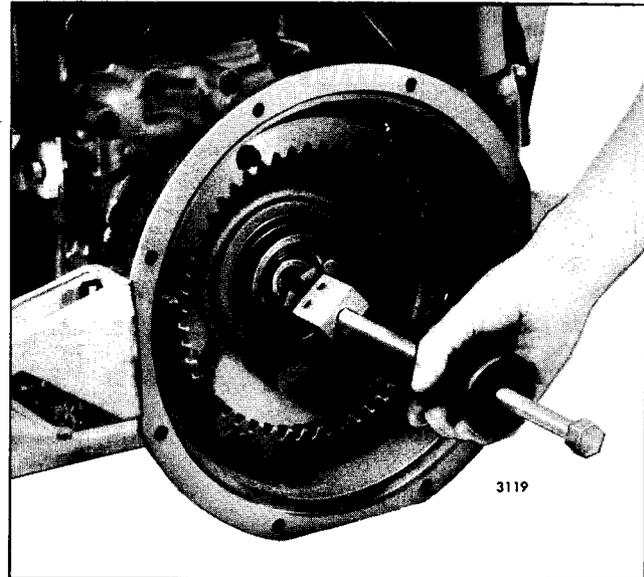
Removing Clutch Drive Shaft Pilot Bearing From Clutch Drive Adaptor
